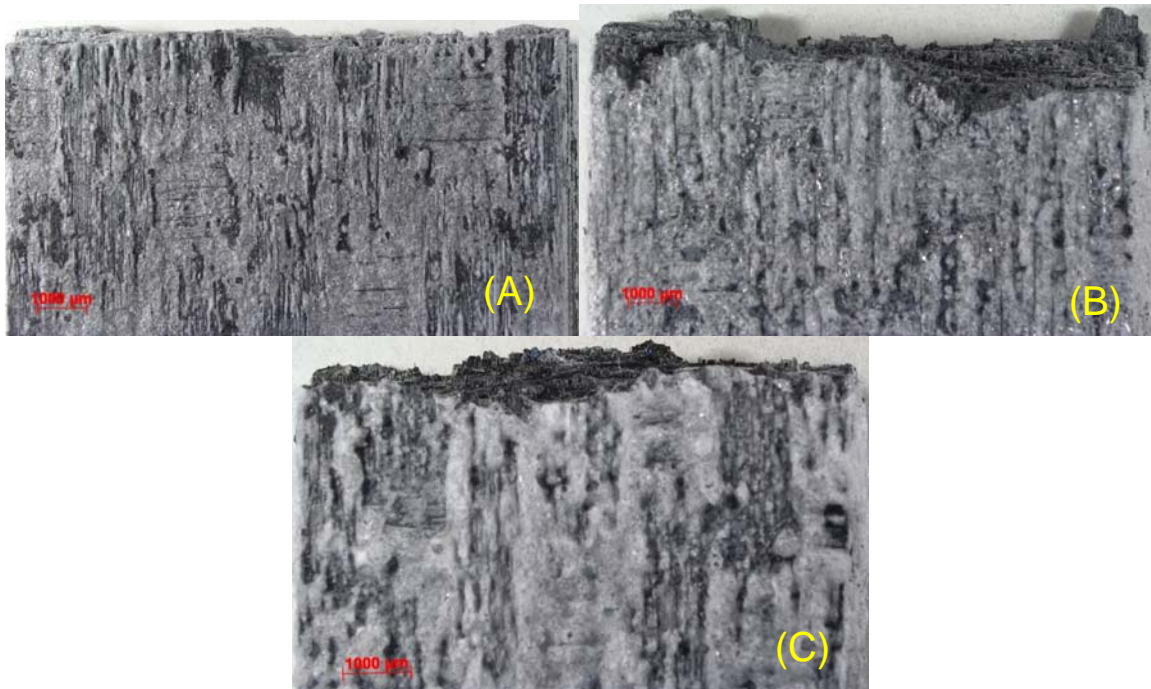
Fracture surfaces of composite C2 specimens fatigued in a steam environment at 1300 °C, Maximum Fatigue Stress Level: (A)180 MPa, (B) 160 MPa, and (C) 140 MPa.
